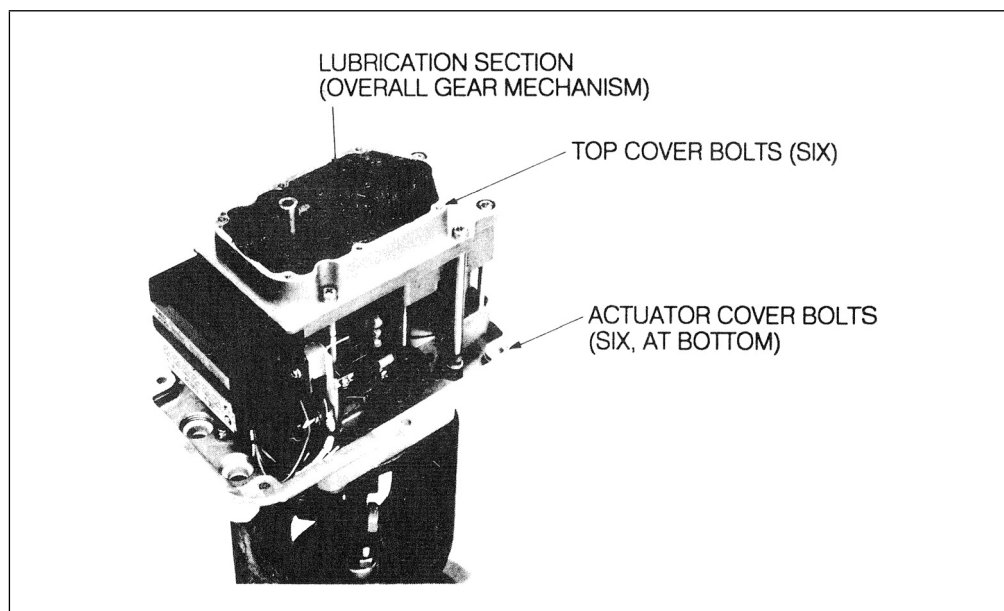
Location of Gear Mechanism to be Lubricated
